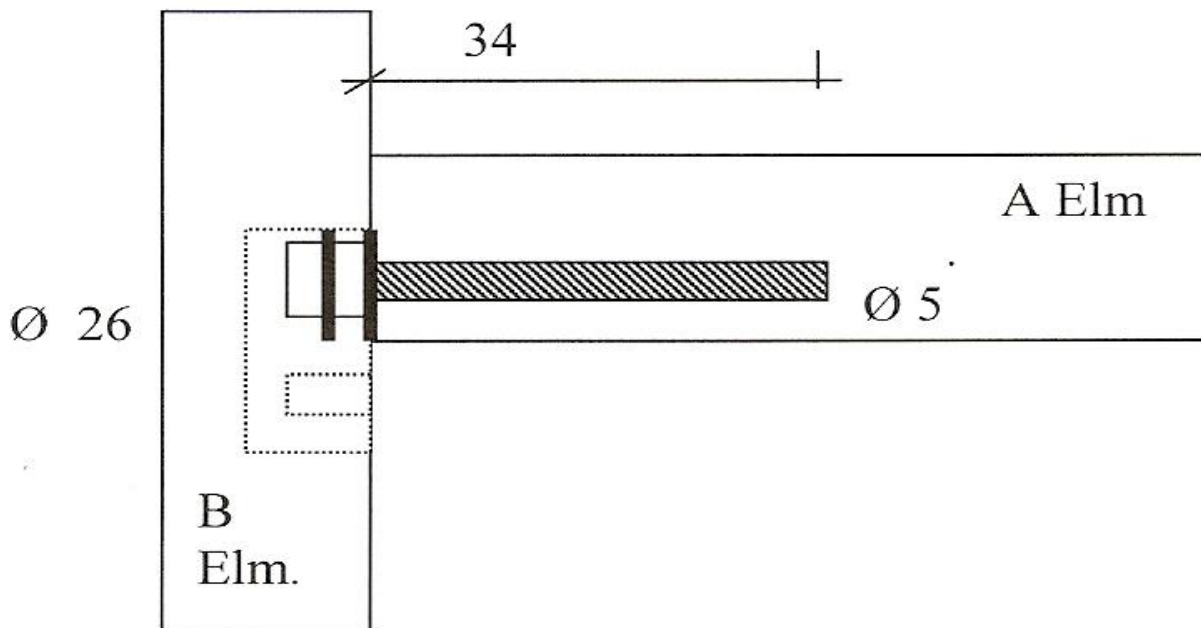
Details of t-type specimen joined with plastic minifix (in mm).
